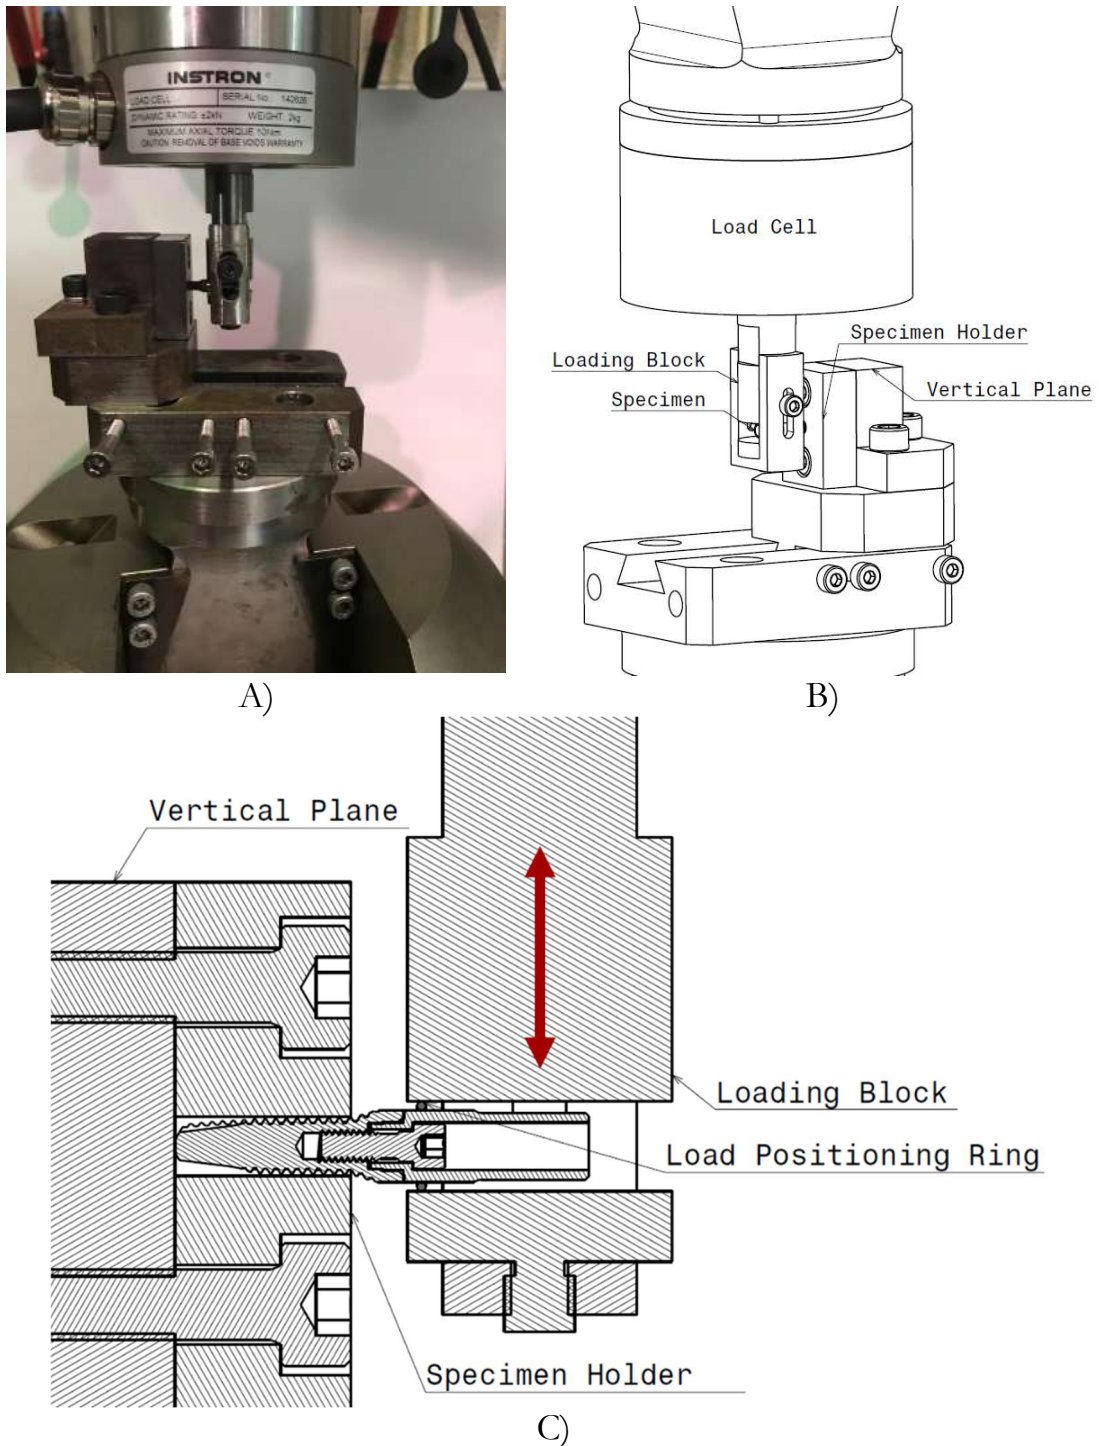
A, Assembly of the fixture tooling designed for self-loosening tests. B, Drawing of the fixture tooling. C, Section view.
